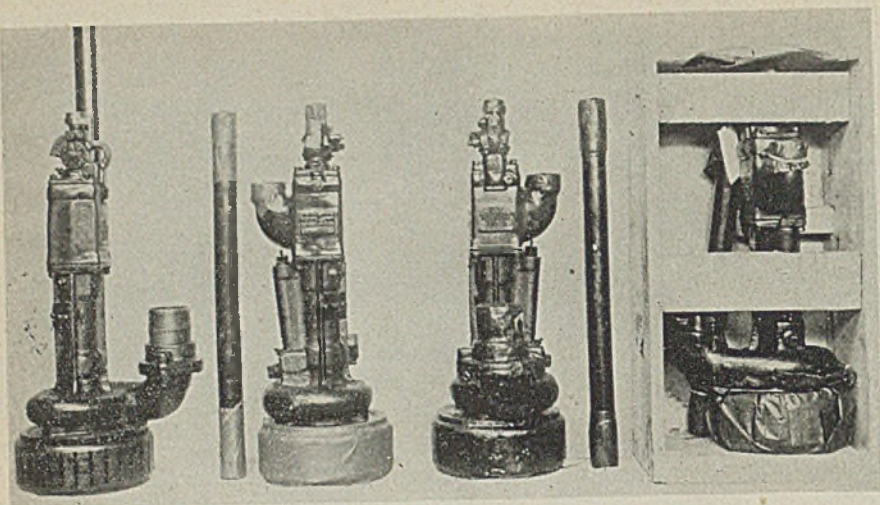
Stages in preparing large equipment items. Interior is sprayed with corrosion preventive, openings sealed, protective wrap applied and boxed. Unit shown here is pneumatic pump
